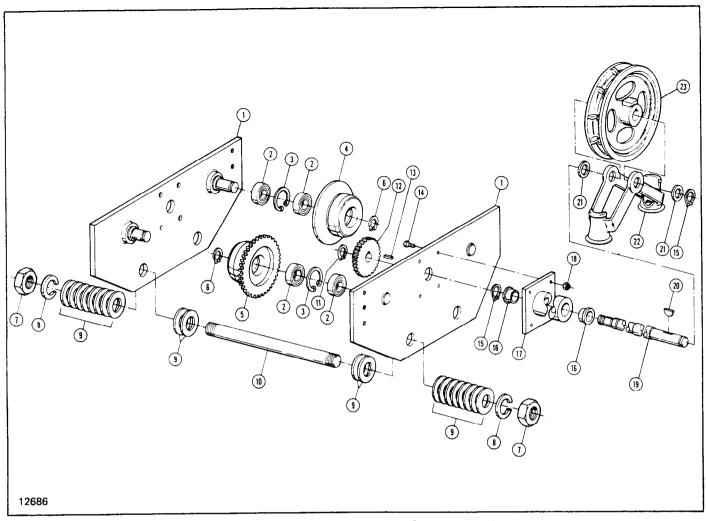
Hand Geared Rigid Mount Trolley Assembly. (4" ϕ Wheels - 6" c/c Pins.)
